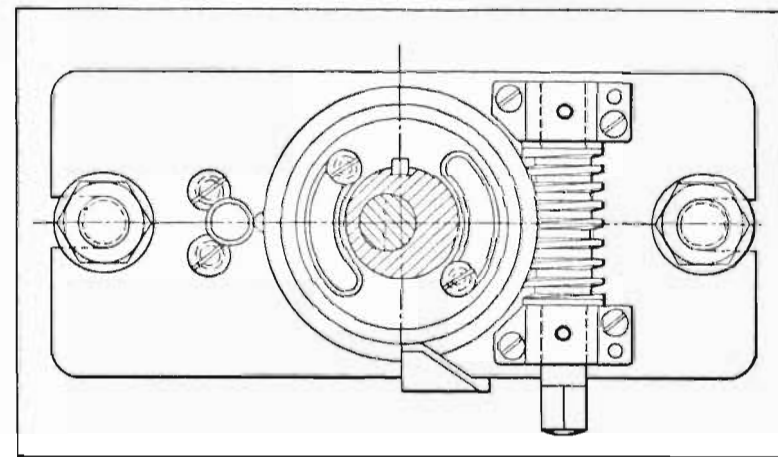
Plan View of the Recessing Tool, Showing How the Cutter Shaft is Fed toward the Work by an Eccentric Sleeve
